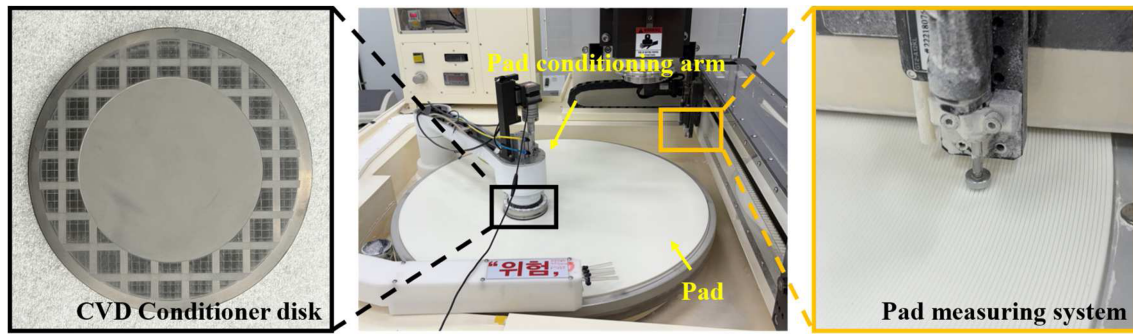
CMP machine (POLI-762) with a pad measurement system and a CVD disk
